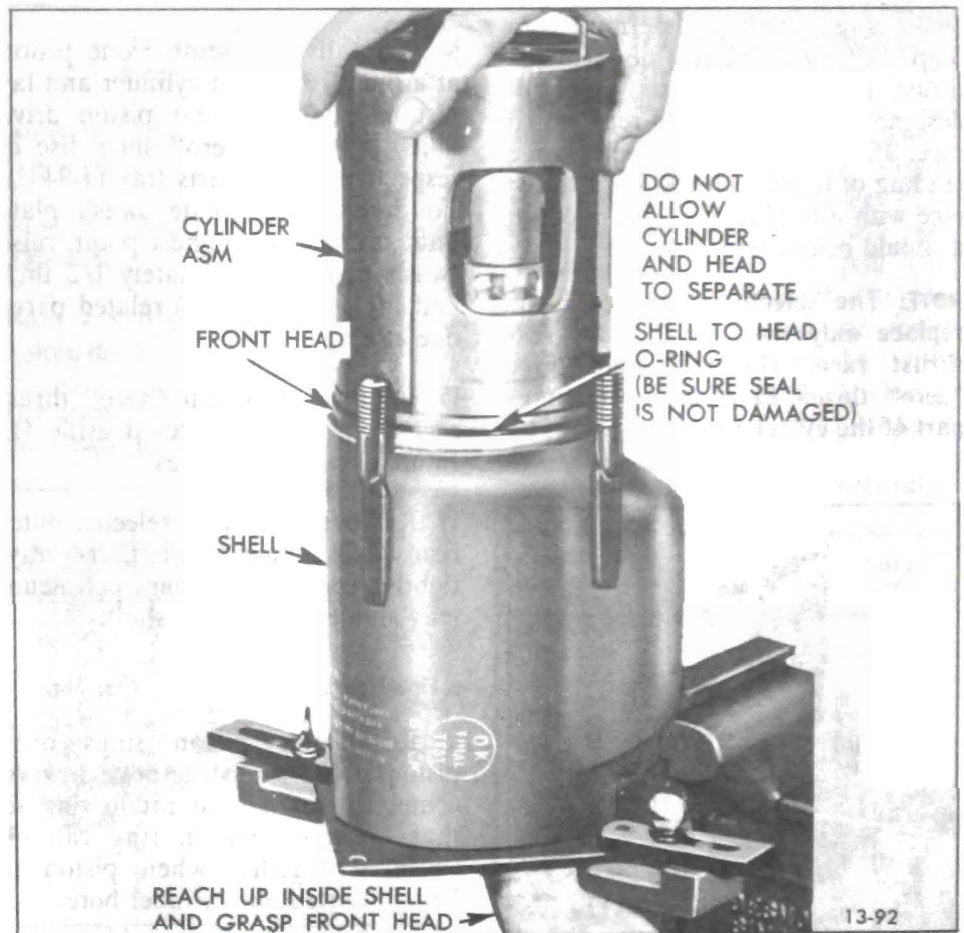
Installing Front Head and Cylinder Assembly in Shell
